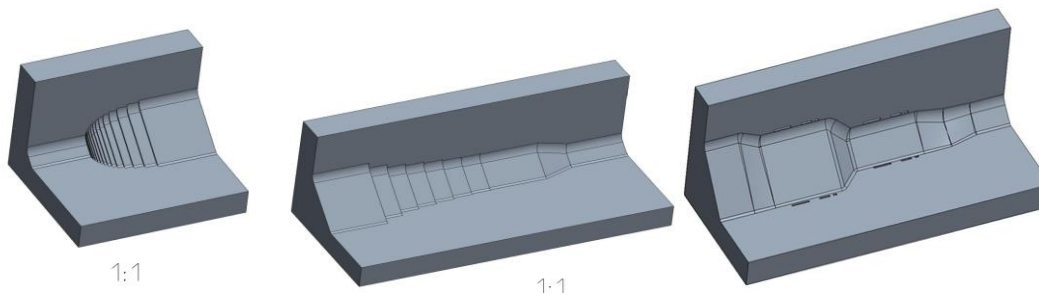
3D printed test blocks, to the right with “printed” weld defects (undercuts).
